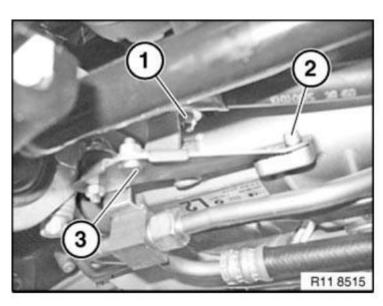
Identifying Exhaust Turbocharger Screws Courtesy of BMW OF NORTH AMERICA, INC.
